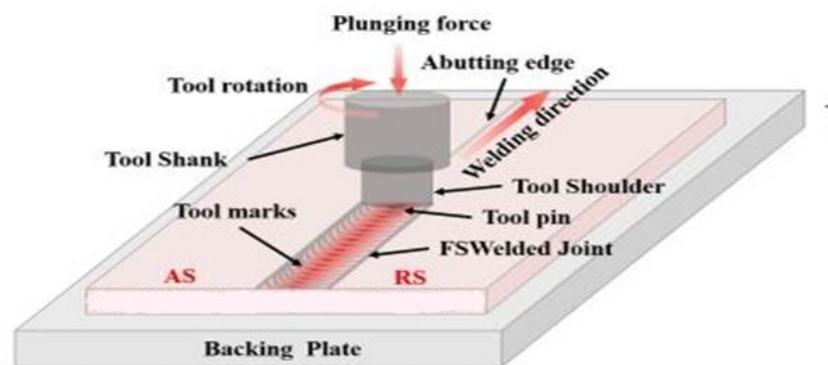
Schematic Diagram of Friction stir welding
